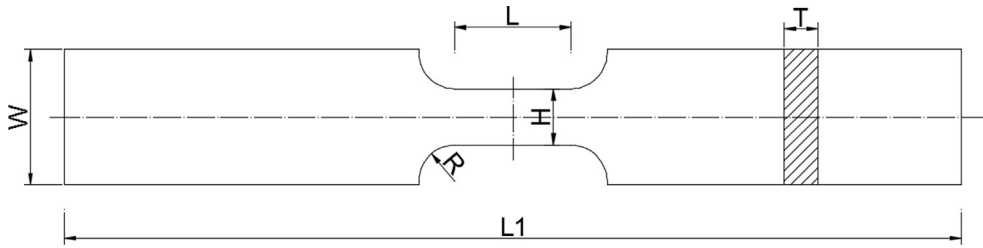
Geometry of specimens used in the fatigue tests [30].
